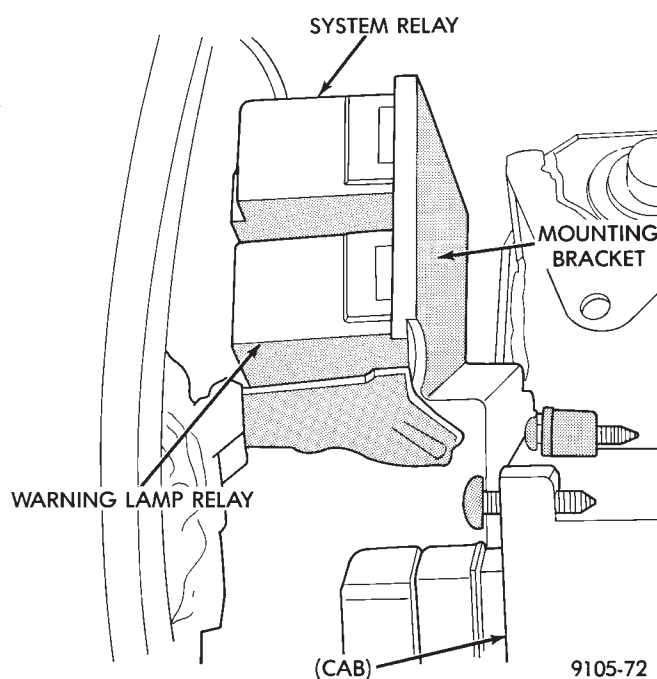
Location Controller Anti-Lock Brake (CAB)
